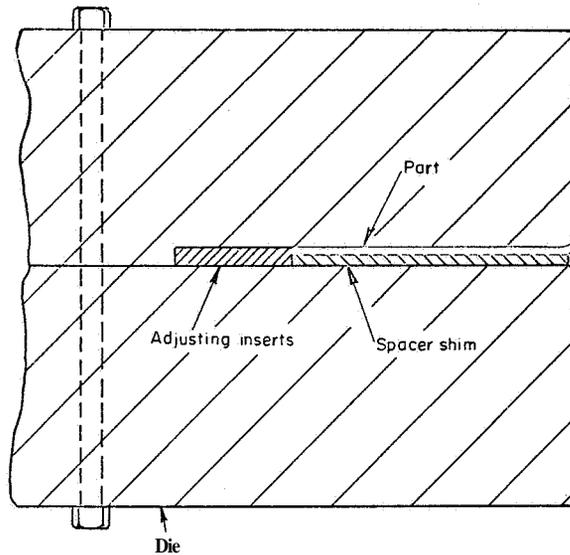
SECTIONAL VIEW OF LINEAR STRETCH TOOLING FOR HEEL-OUT ANGLES (Ref. 66)
